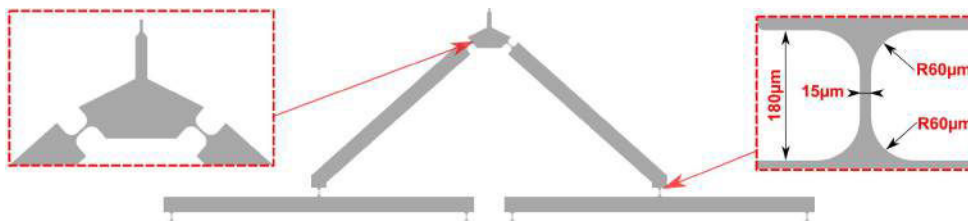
Drawing of the head mechanism at the head of the DiMiBot including the end effector, the beams and the compliant hinges.
